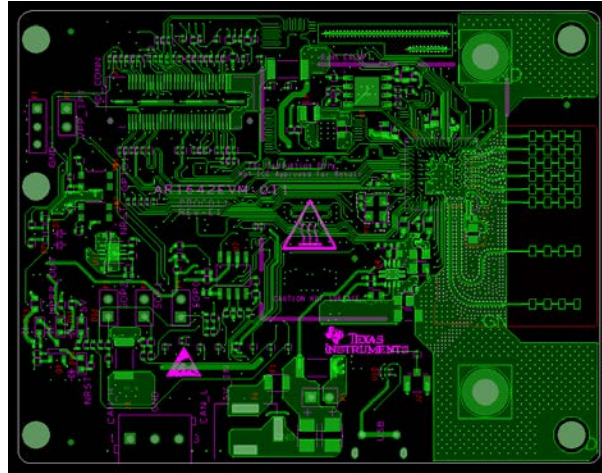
IWR1642 Boosterpack EVM – Allegro PCB Top Layer View
